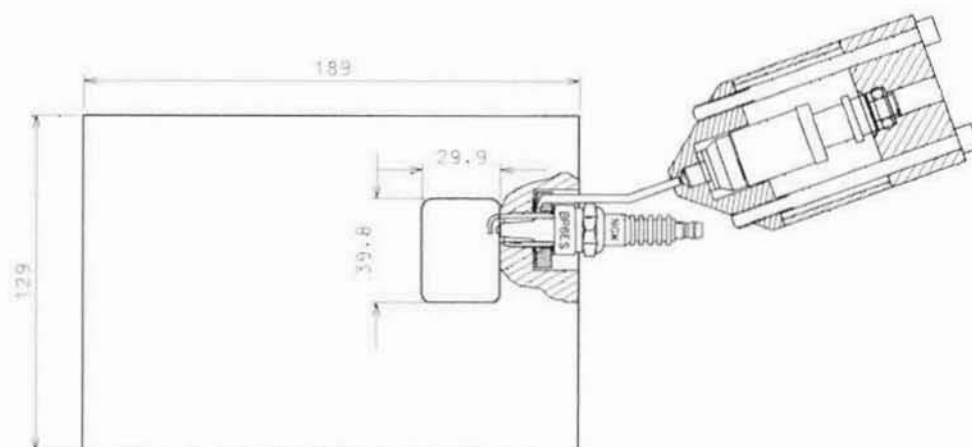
Bomb Arrangement with Modified Spark Plug Injector
